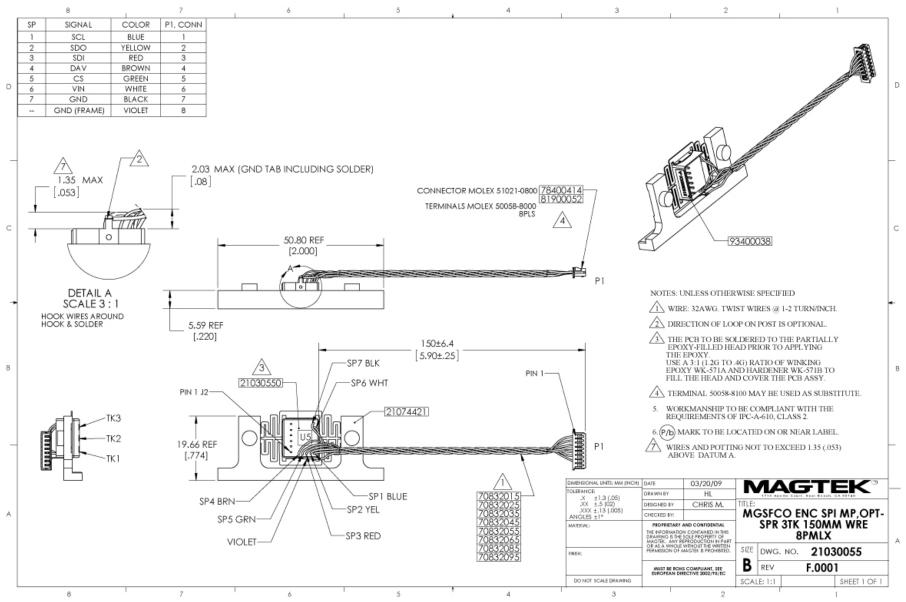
Encrypting SPI MagnePrint module with 150mm cable & 8-pin connector
